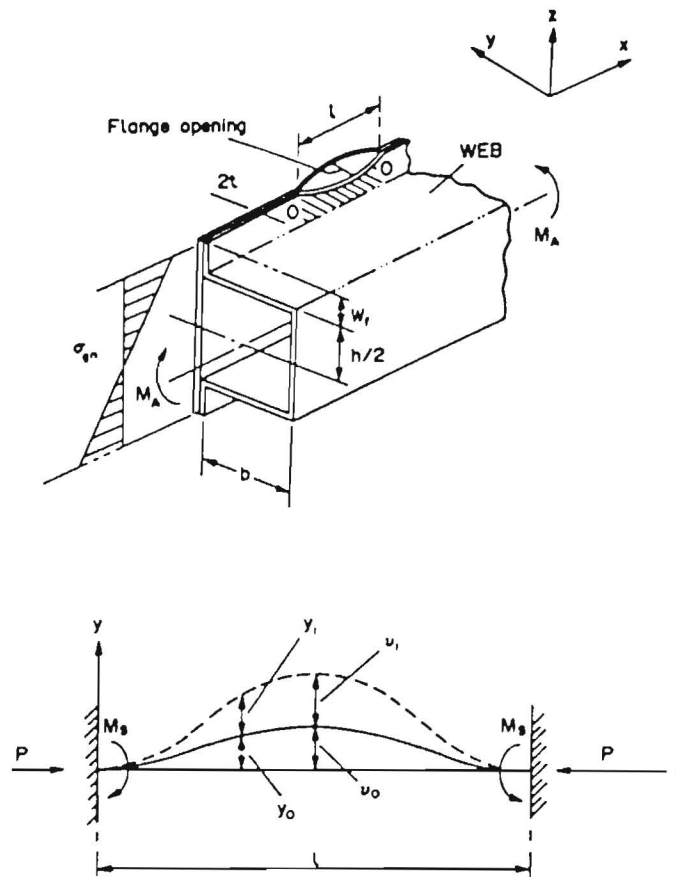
Buckling model for the spot weld spacing on the flange.
